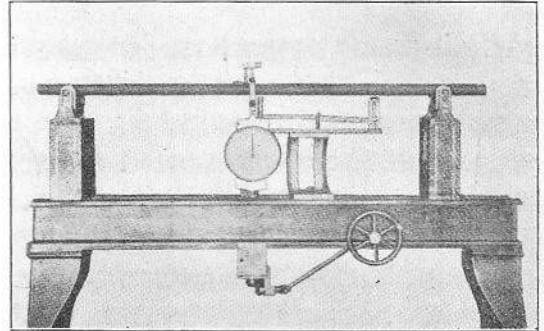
Tube Pending Machine for Inspection Tests for Minimum Yield Point.
